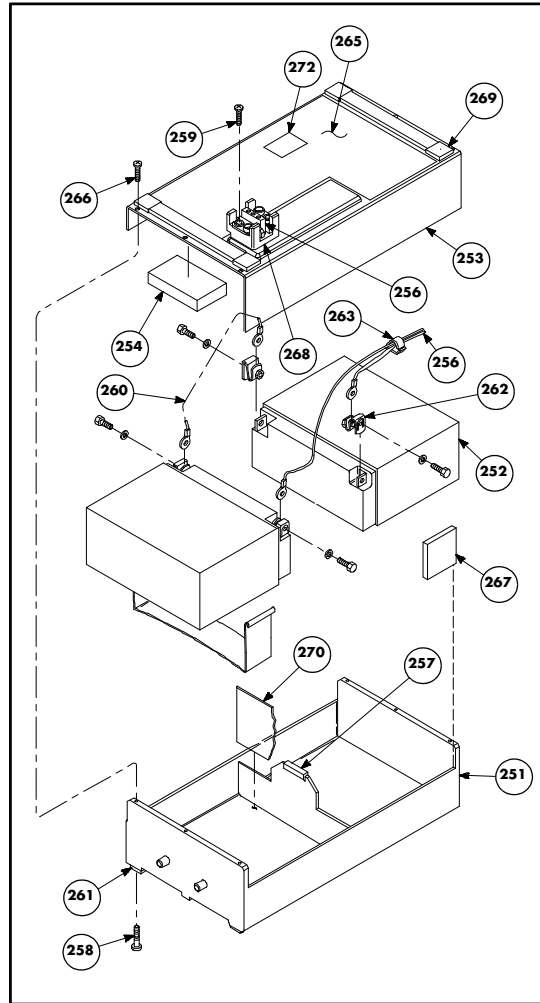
Isometric Drawing, Chassis, Right Side
